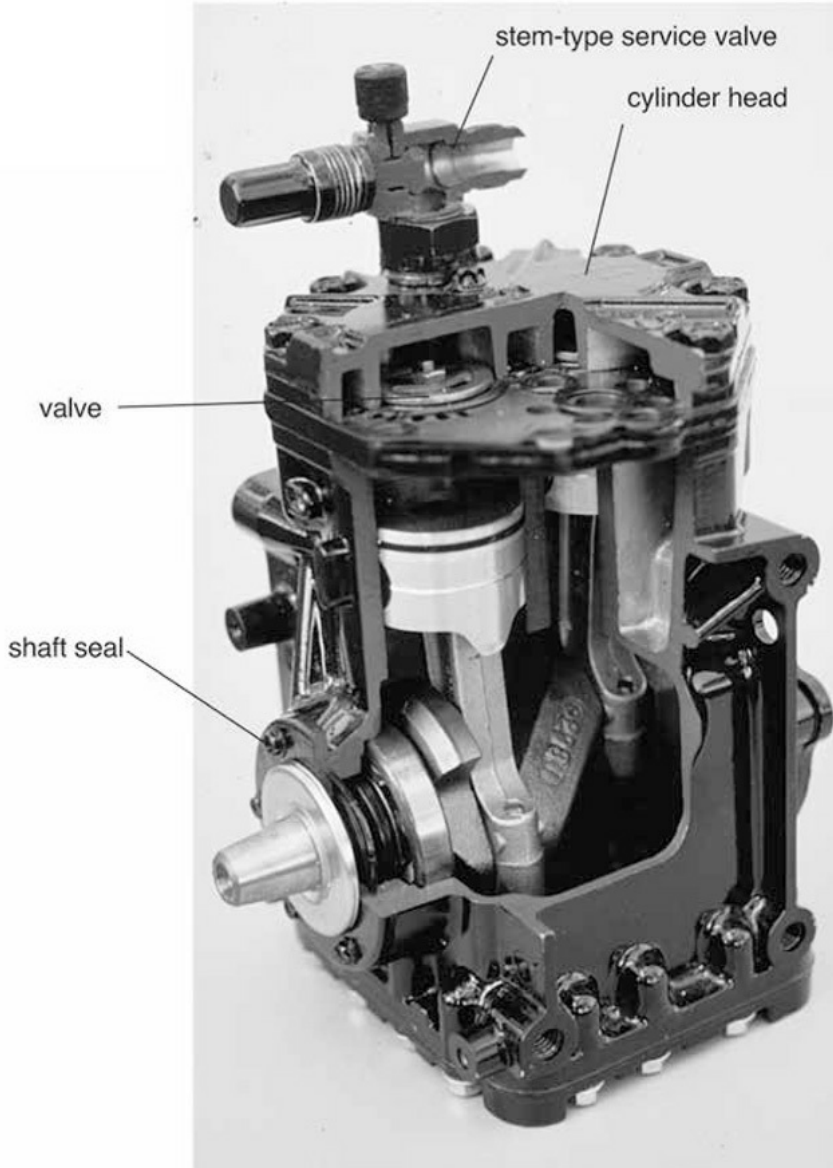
A. A cutaway of a reciprocal compressor.
